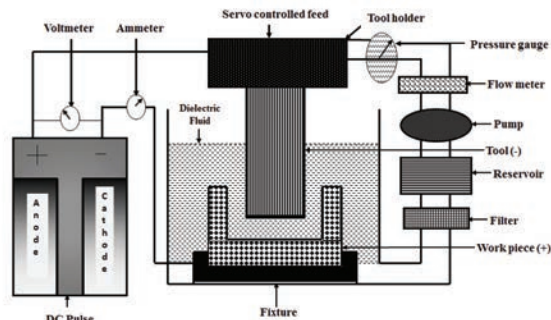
Schematic diagram of Electric Discharge Machining Process
